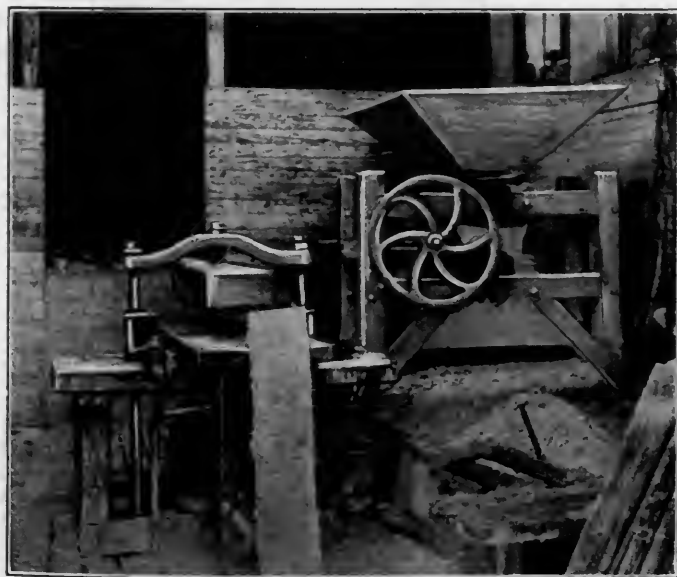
Grinding and Picking Machine, Air Press and a Completed Sheet of Lagging
